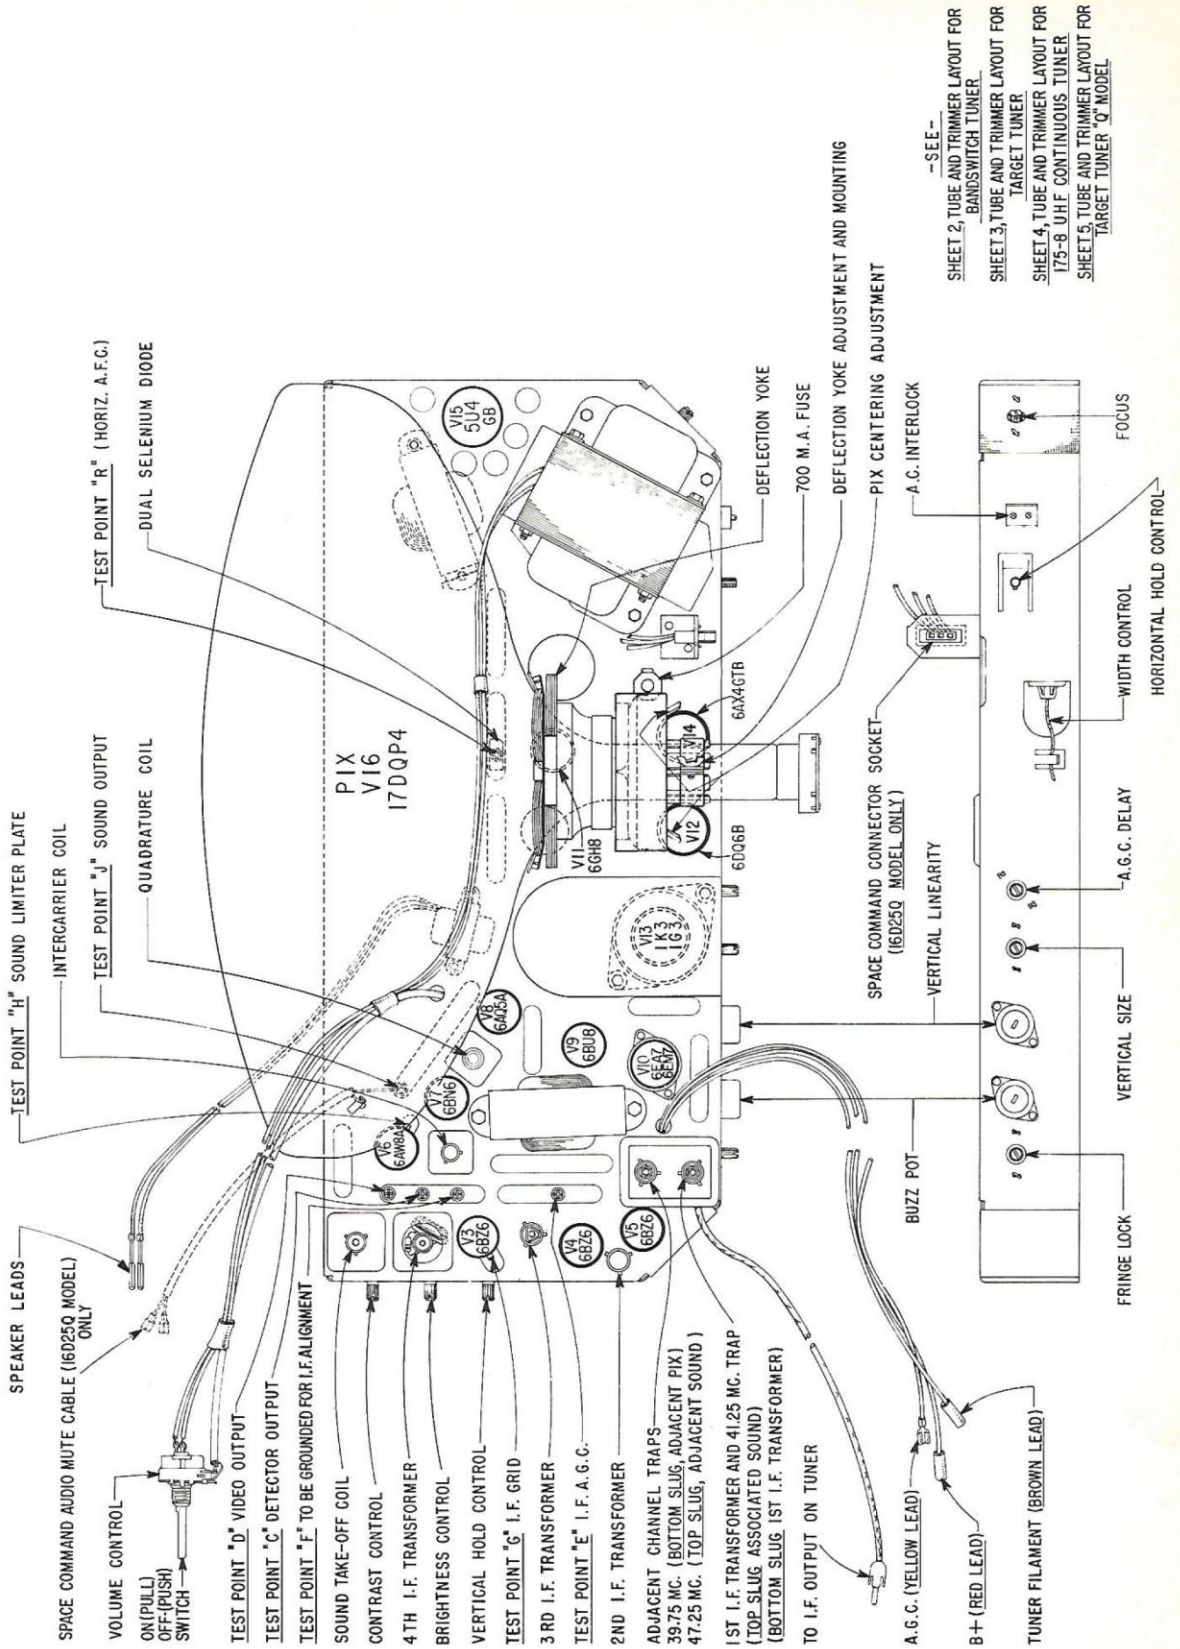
Tube and Trimmer Layout 16E25 and 16E25Q Chassis
